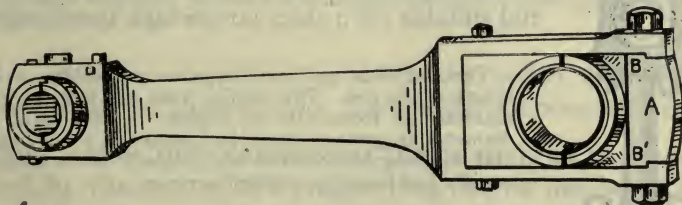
Connecting rod of the Ames engine. The extreme end is a separate piece removable by taking out the end bolts. The brasses are then easily accessible. The rod is provided with block adjustment.
